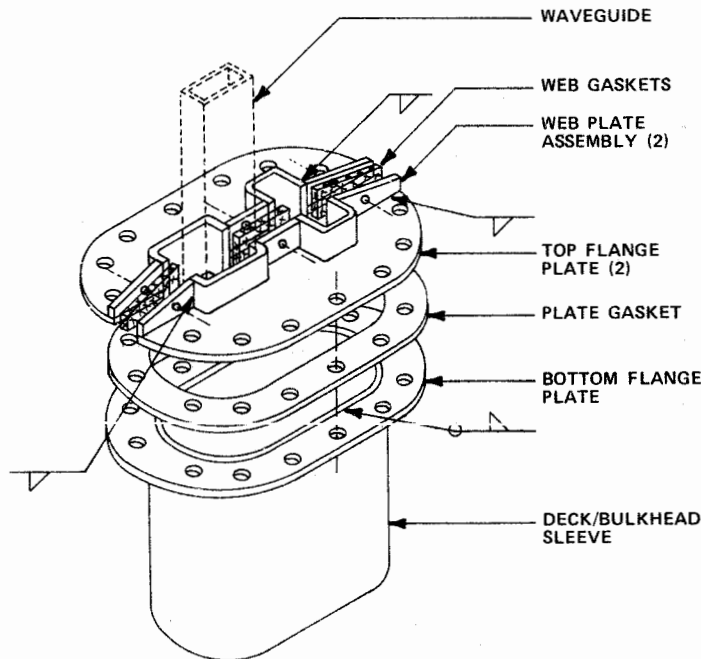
Typical Split Sleeve Assembly for Multiple Waveguide Run
